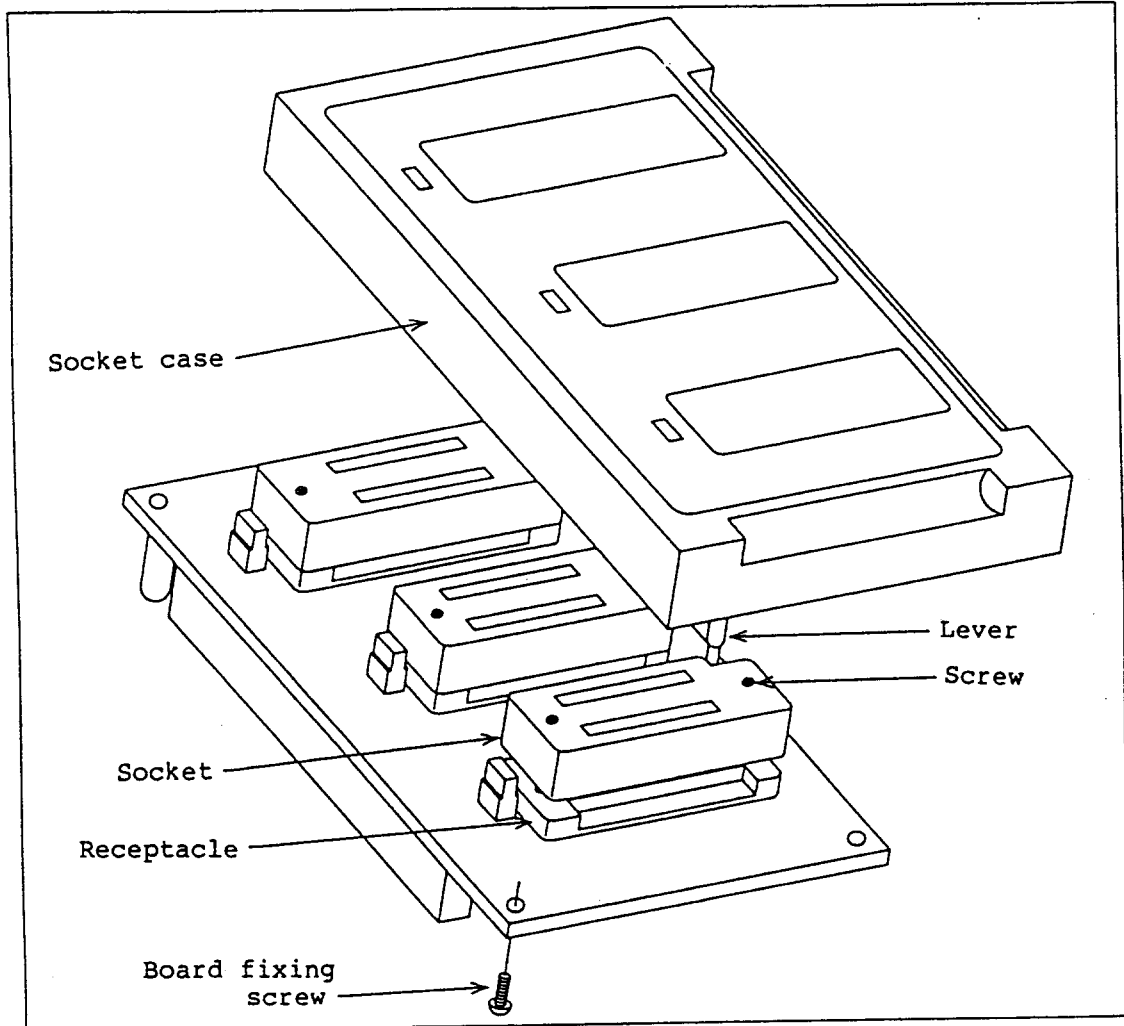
1 Deal drawing of the socket adapter (R49451A)
